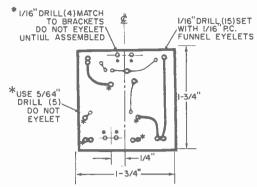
This is foil side of printed circuit board. Numbers in parentheses indicate holes required.
